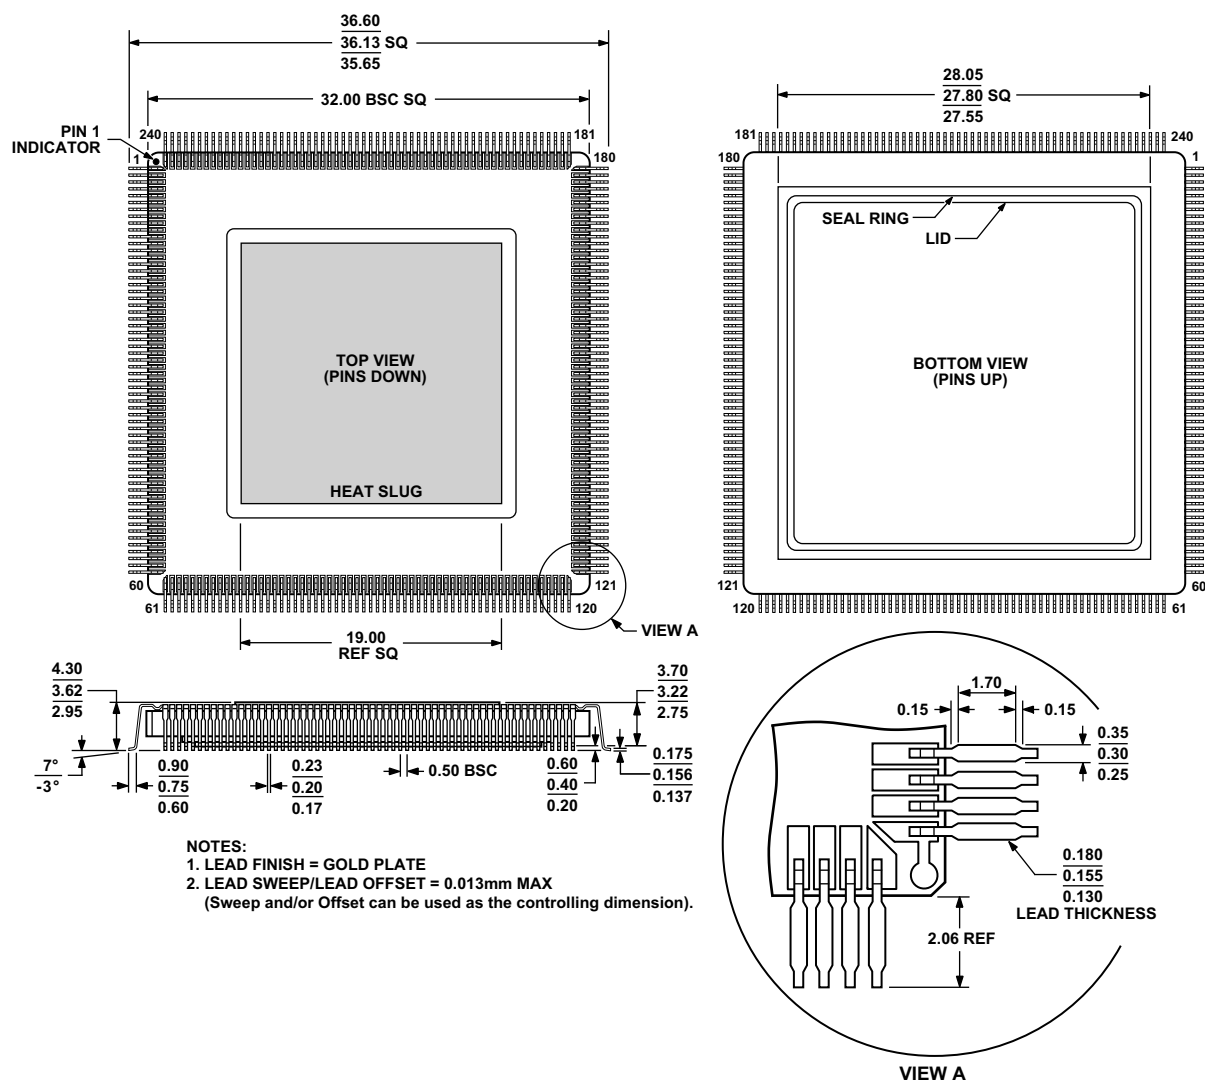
240-Lead Ceramic Quad Flat Package, Heat Slug Up [CQFP]
